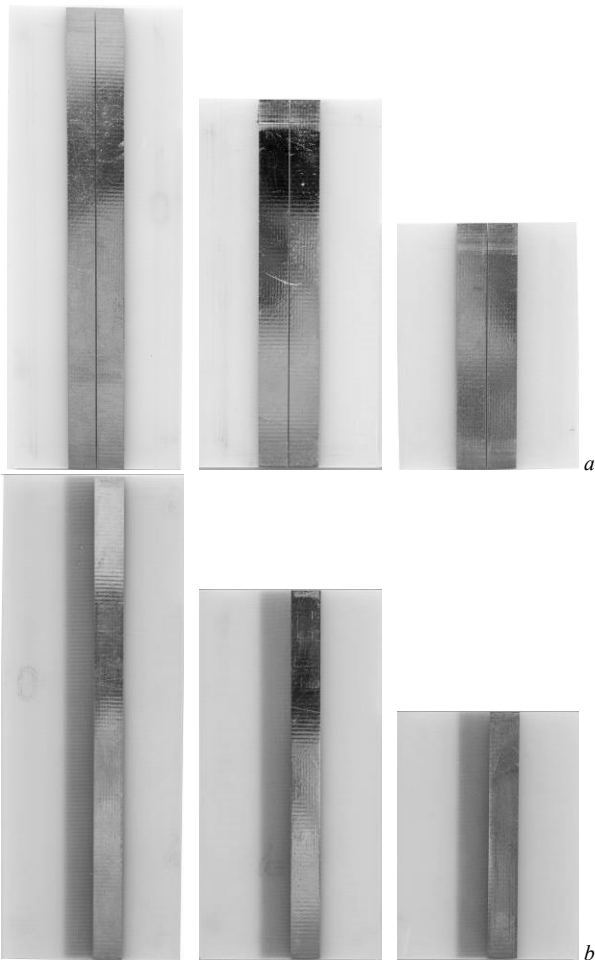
Manufactured prototypes: top (a) and bottom (b) views
